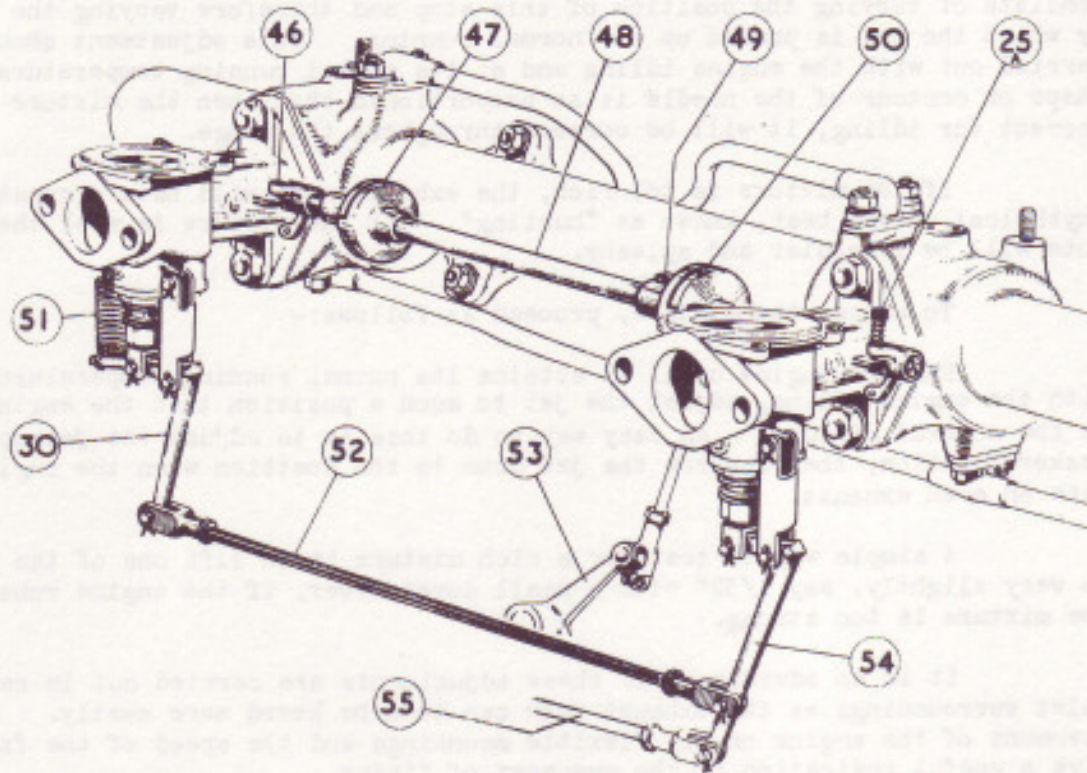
VIEW OF CARBURETTOR CONTROLS. (CARBURETTORS PARTLY DISMANTLED FOR CLARITY).
